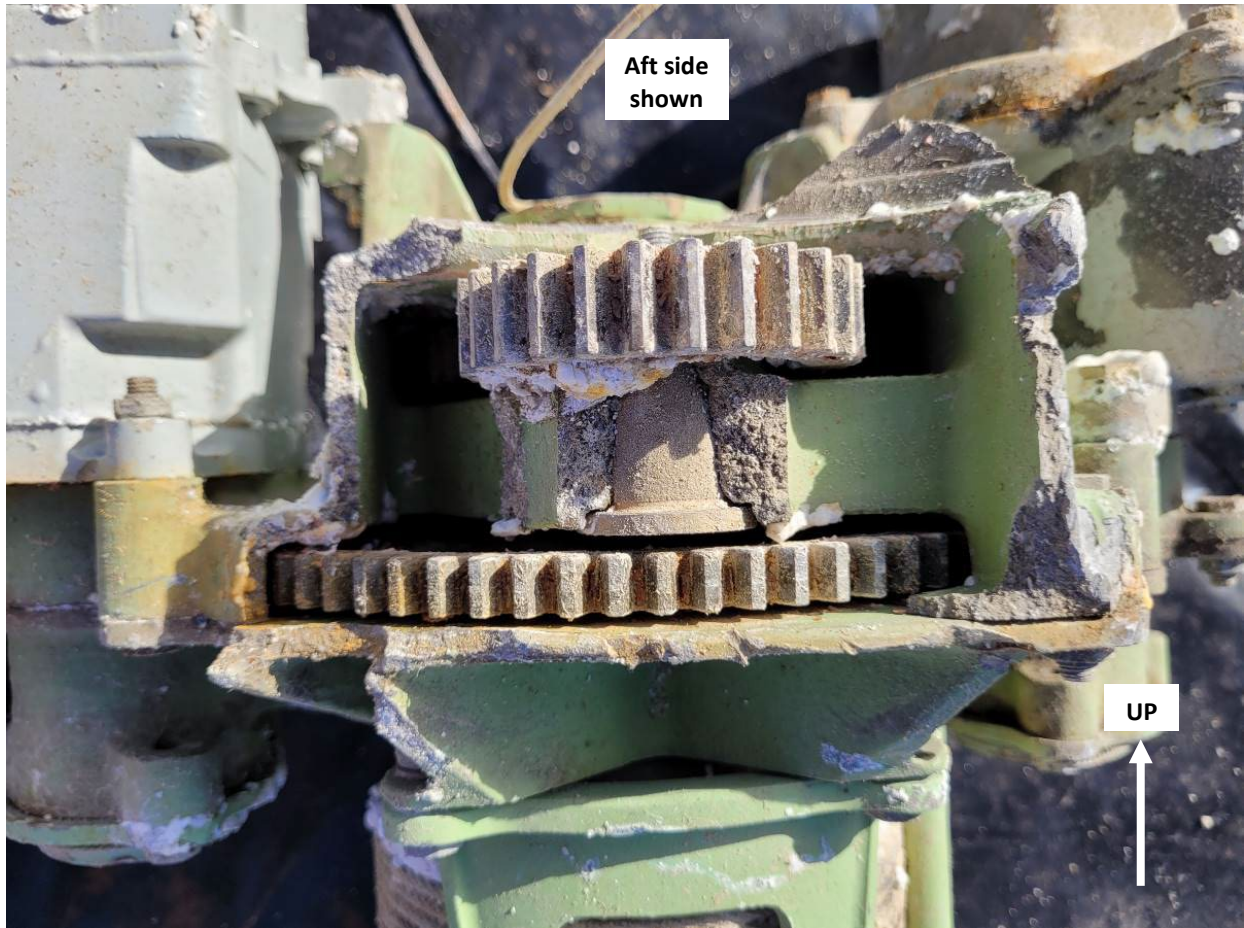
Close-up of jackscrew gearbox fracture (Boeing photo)
